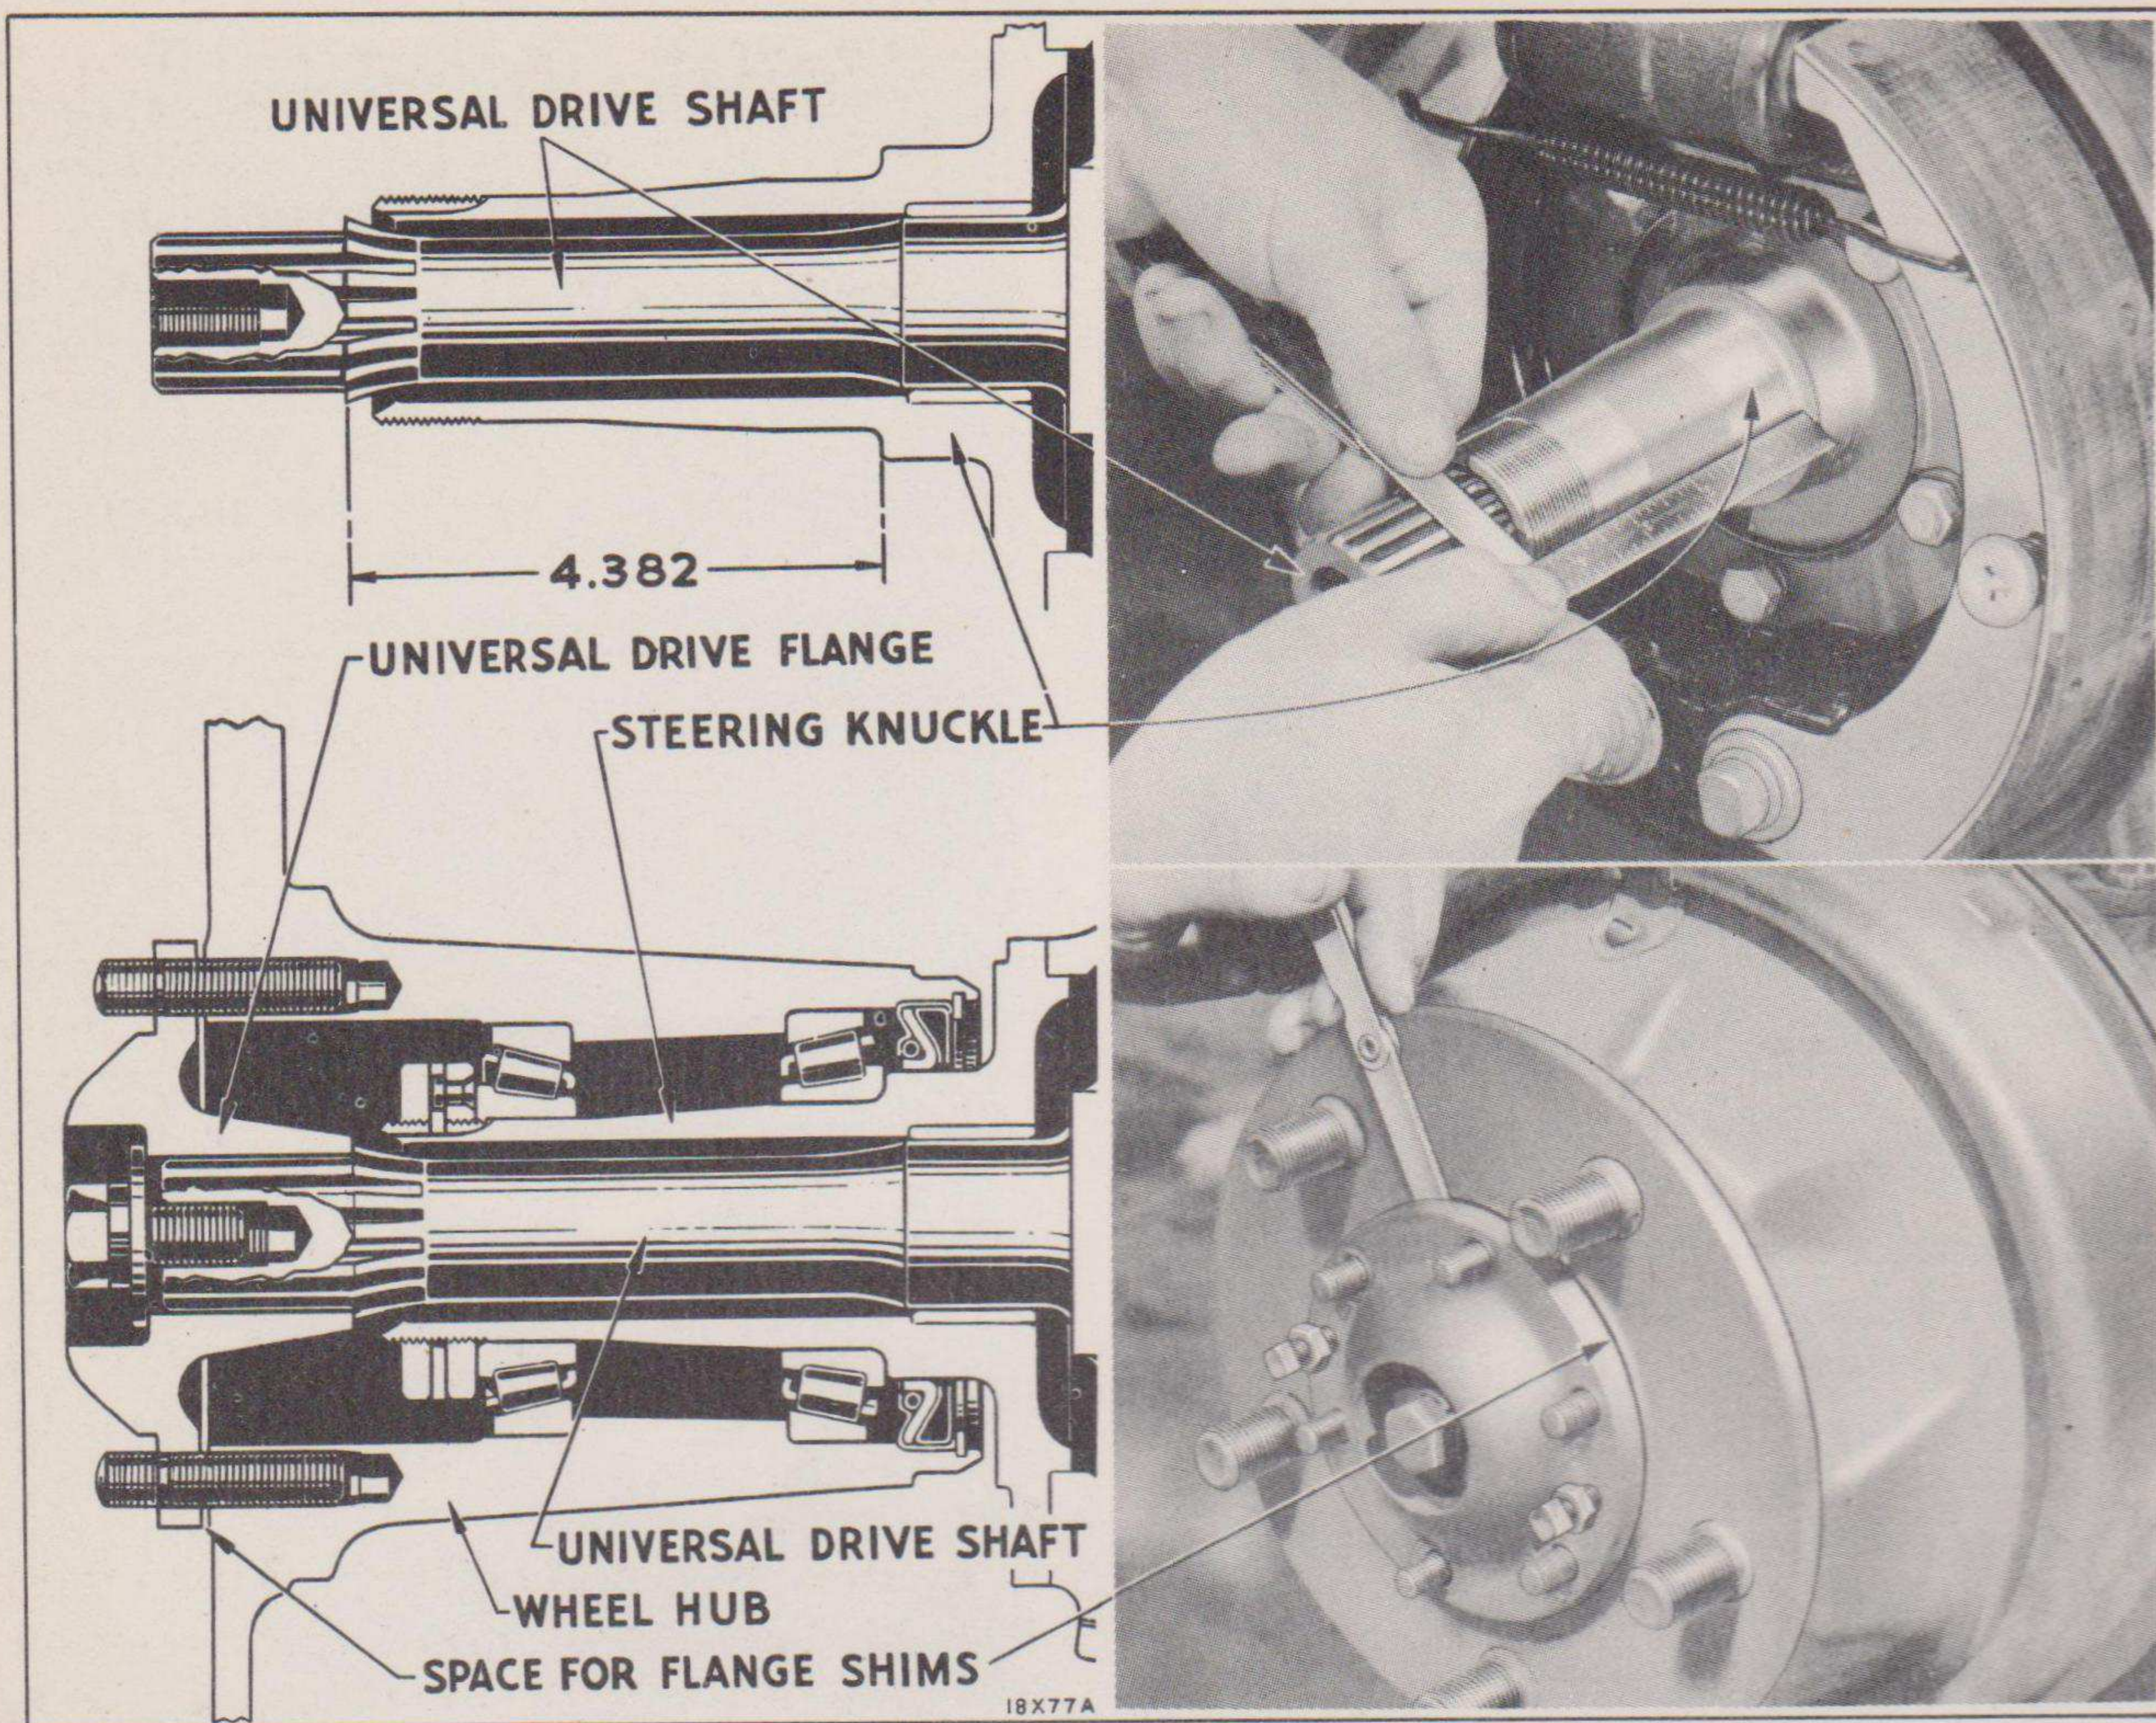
Front Axle Shaft End-Play Adjustment (Bendix-Weiss only)
